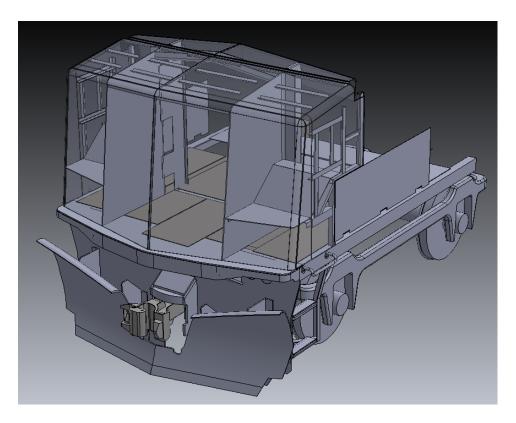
CAD model of a conventional F40 locomotive (modified to be S-580 compliant)
